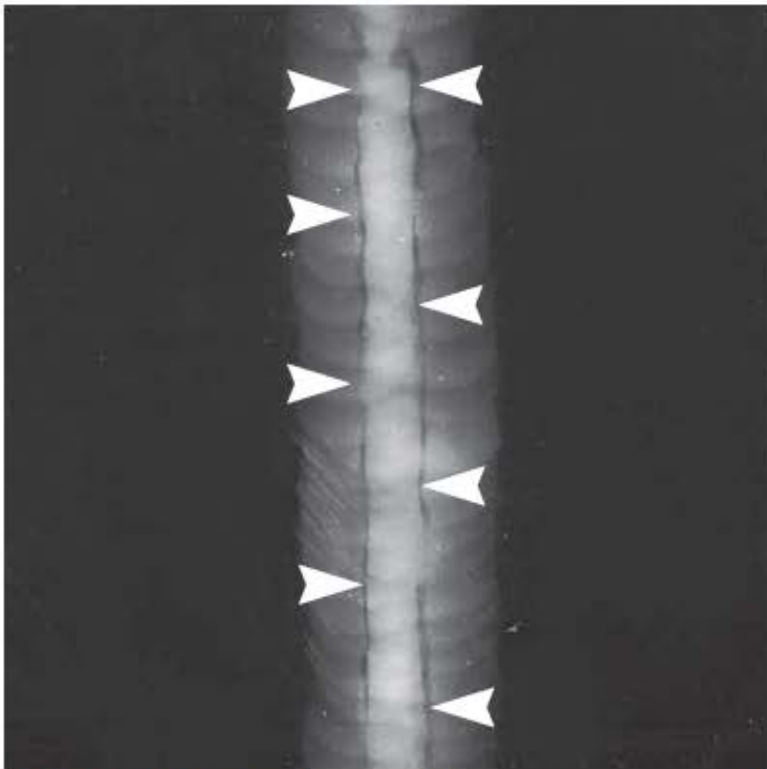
Welding defects with radiographic images. Reprinted with permission of E. I. DuPont de Nemours & Co., Inc. (continued)
